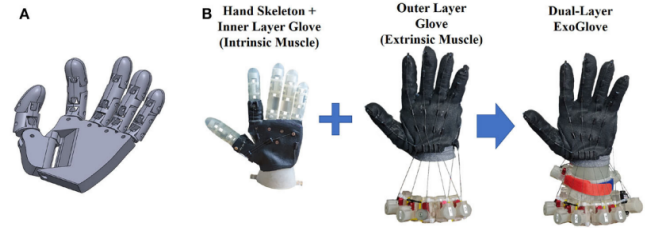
Design and assembly of the dual-layer exo-glove robotic hand
